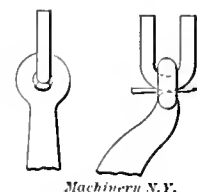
A Link when Welding Link connecting Hook and Chain.
